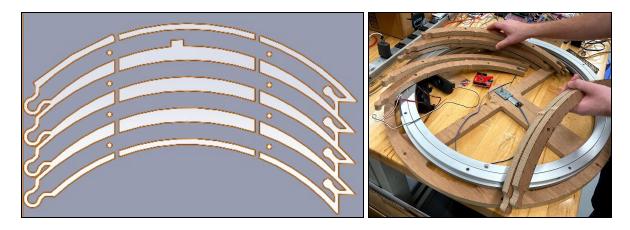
The image on the left is taken from SolidWorks of four quadrants to cut one outer frame layer out using the CNC. The image on the right shows the pieces after cutting and before gluing
